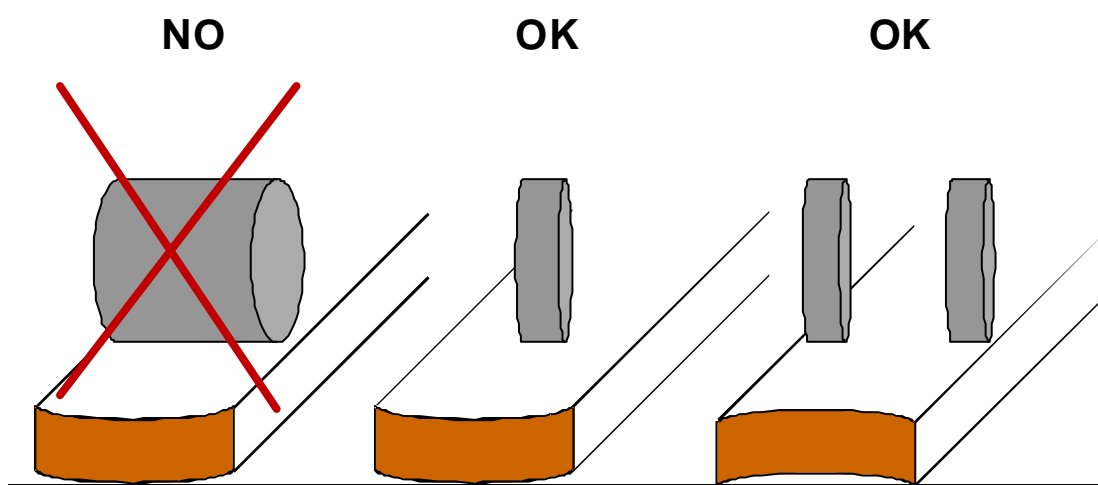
Recommended infeed rollers to avoid cracking of the boards.
